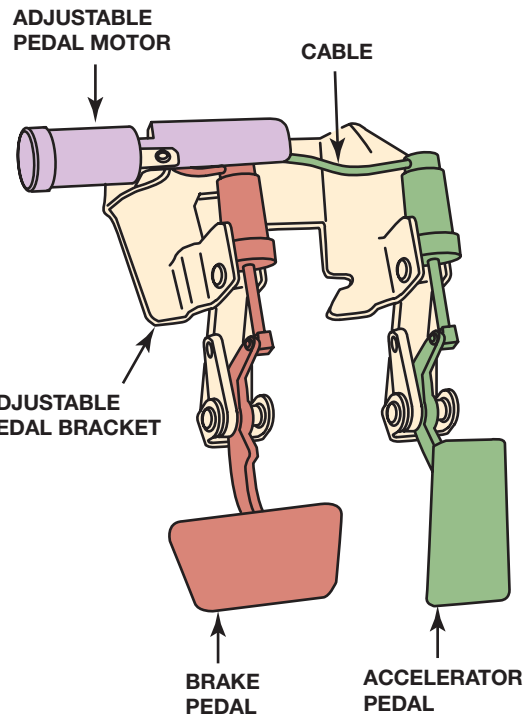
A typical adjustable pedal assembly. Both the accelerator and the brake pedal can be moved forward and rearward by using the adjustable pedal position switch.
